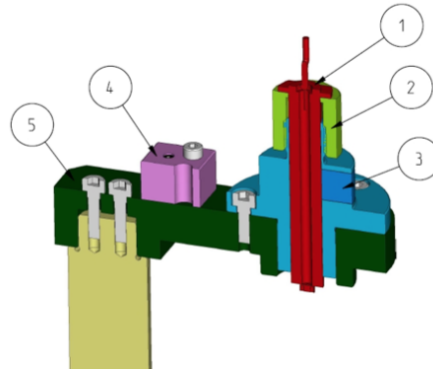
Measuring system assembly on the dilatometer bench. (1: contactless, magnetic inductive gauge, connected to E9066 Marposs electronics; 2: gauge adjustment ring; 3: gauge fixture ; 4: room thermal probe; 5: frame.
